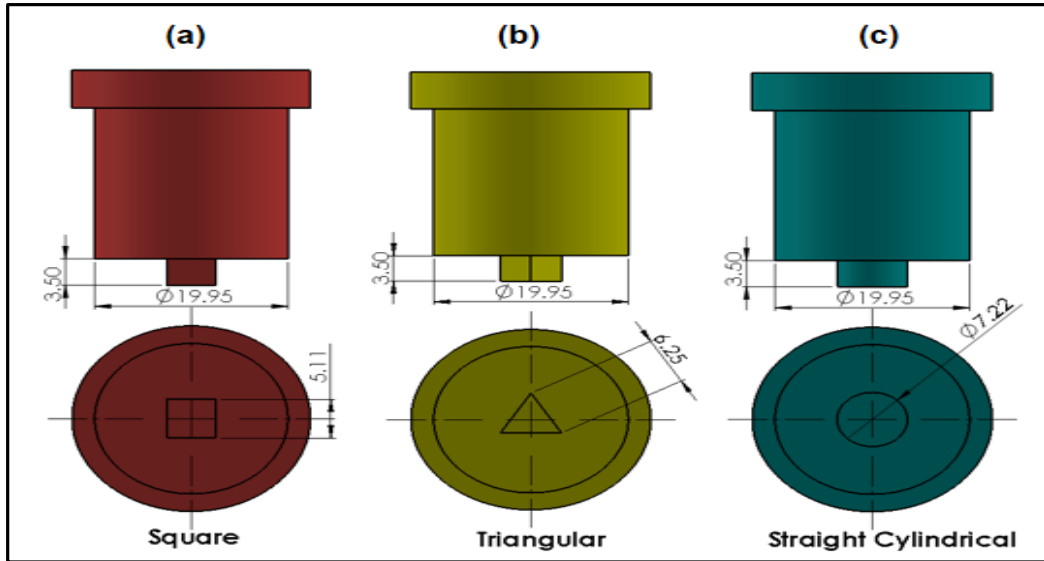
Tool pin profiles design and geometry of a FSP tool (a) Square pin (b) Triangular pin (c) Cylindrical pin
